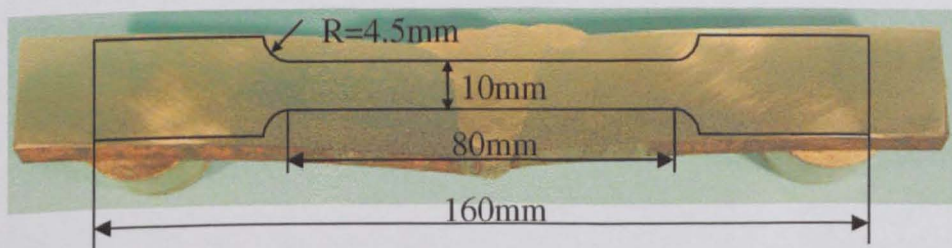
The dimensions of the standard tensile test specimen and its machining position on the slice taken from the girth weld.
